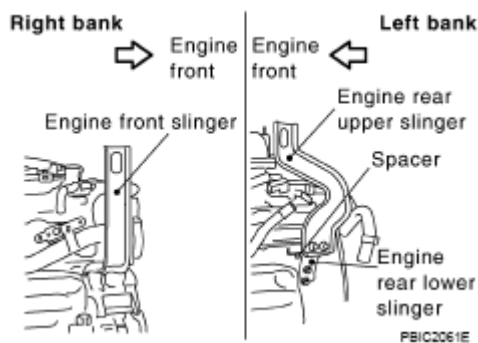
Identifying Engine Slingers Into Front Of Cylinder Head
